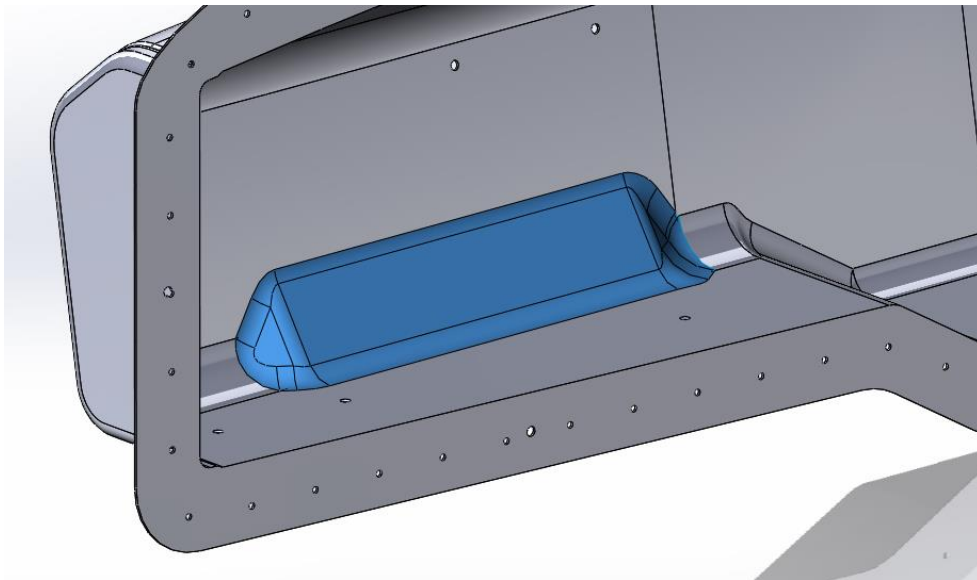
Separate FLCA mounting surface boss highlighted in blue.
